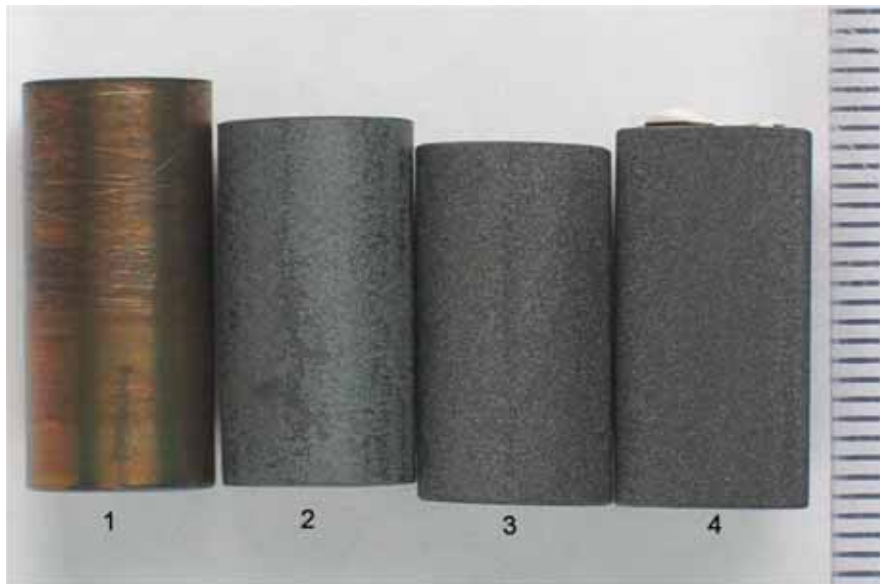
Alloy 316L tube samples after 1000 h exposure under SCW conditions at 650°C: Sample 1) machined with blunt edge hard metal cutting tool, 2) “as received”, 3) surface finish after machining with #600 emery paper and 4) with #1200 emery paper.
